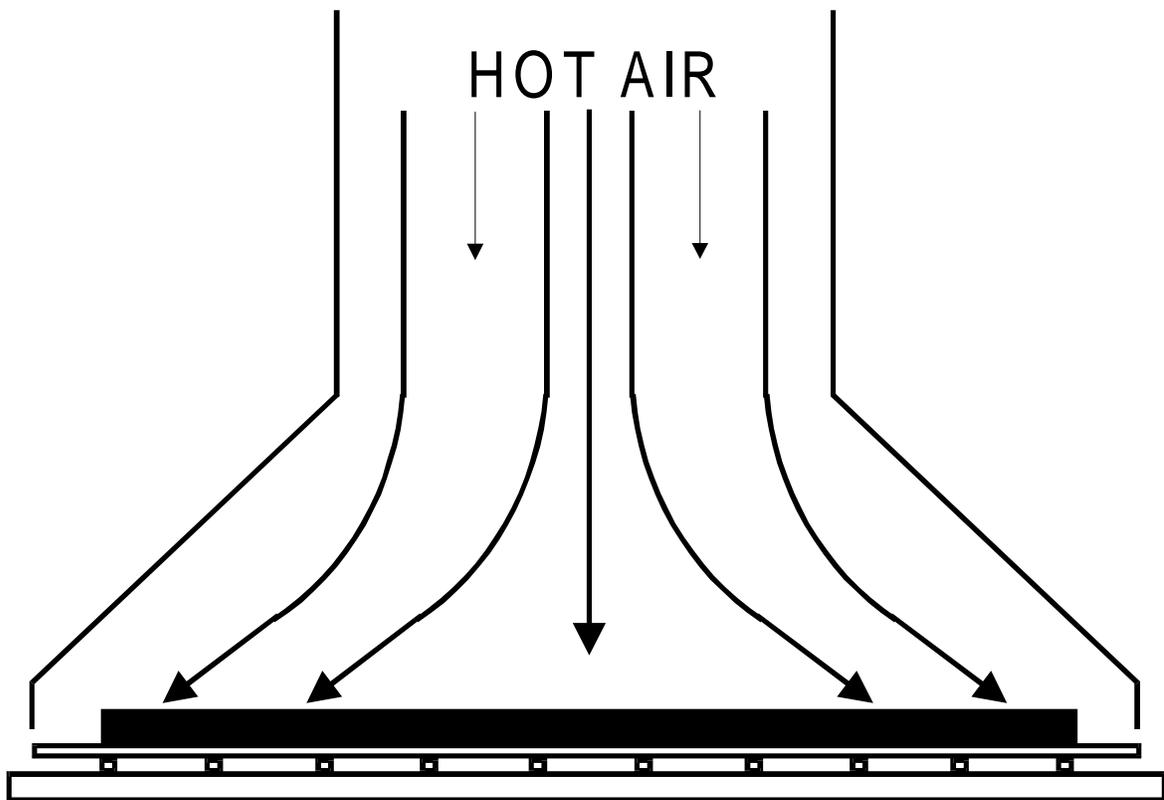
Typical Nozzle Configuration for PBGA Chip Removal.
